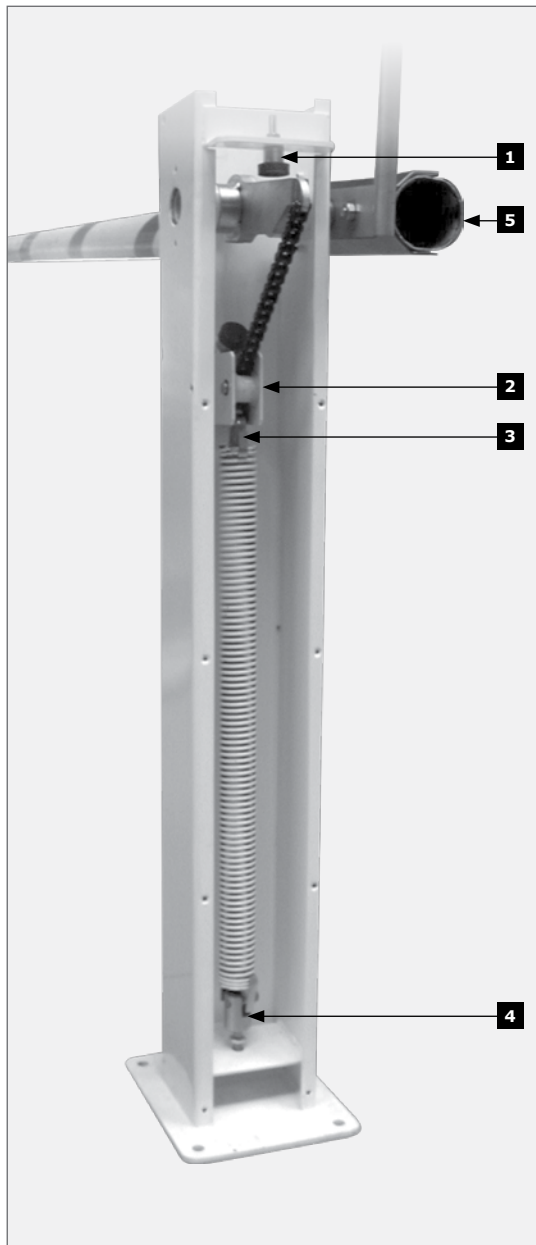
CENTINEL BARRIER INTERNAL SPRING ASSEMBLY
